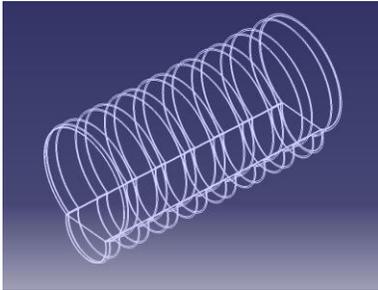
PRESSURE HUB IN WIRE FRAME VIEW
